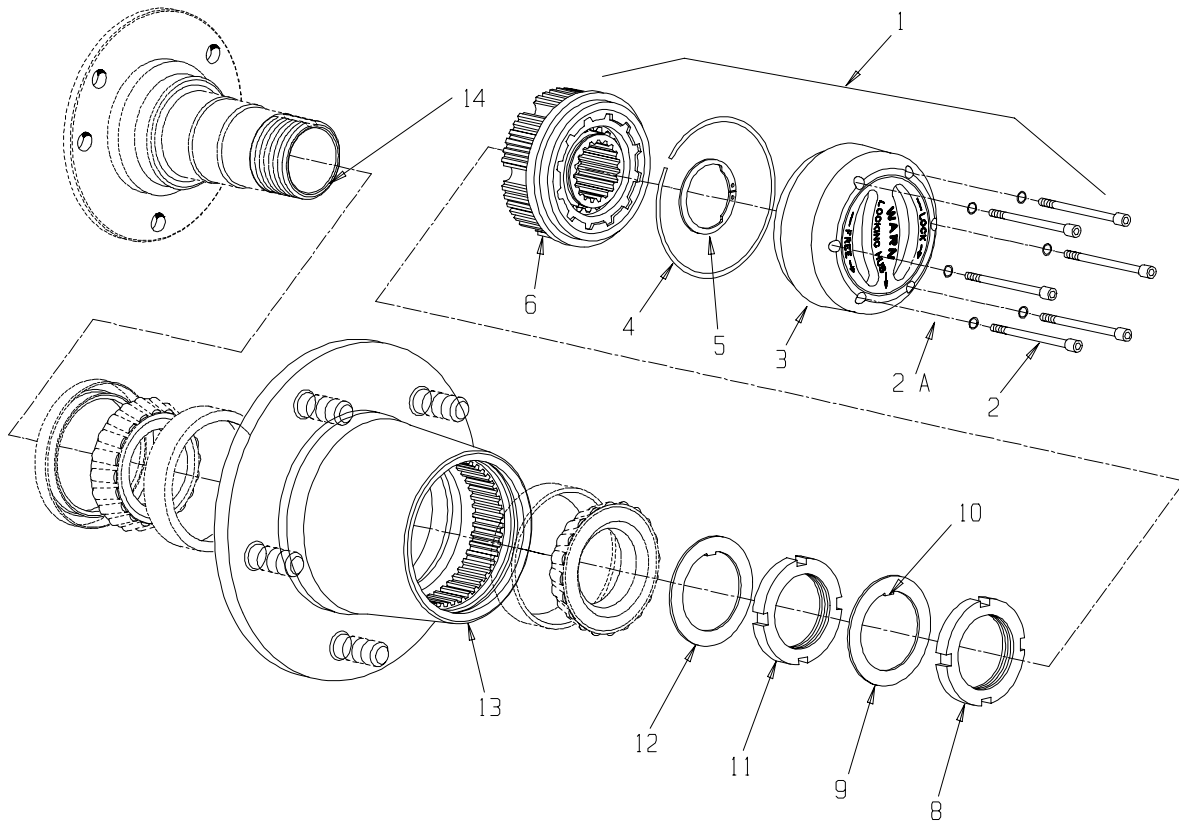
Front wheel hub conversion kit. Parts not included in kit are drawn with dashed lines.
